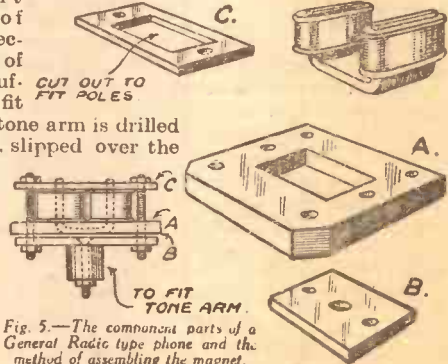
The component parts of a General Radioc type phone and the method of assembling the magnet.
